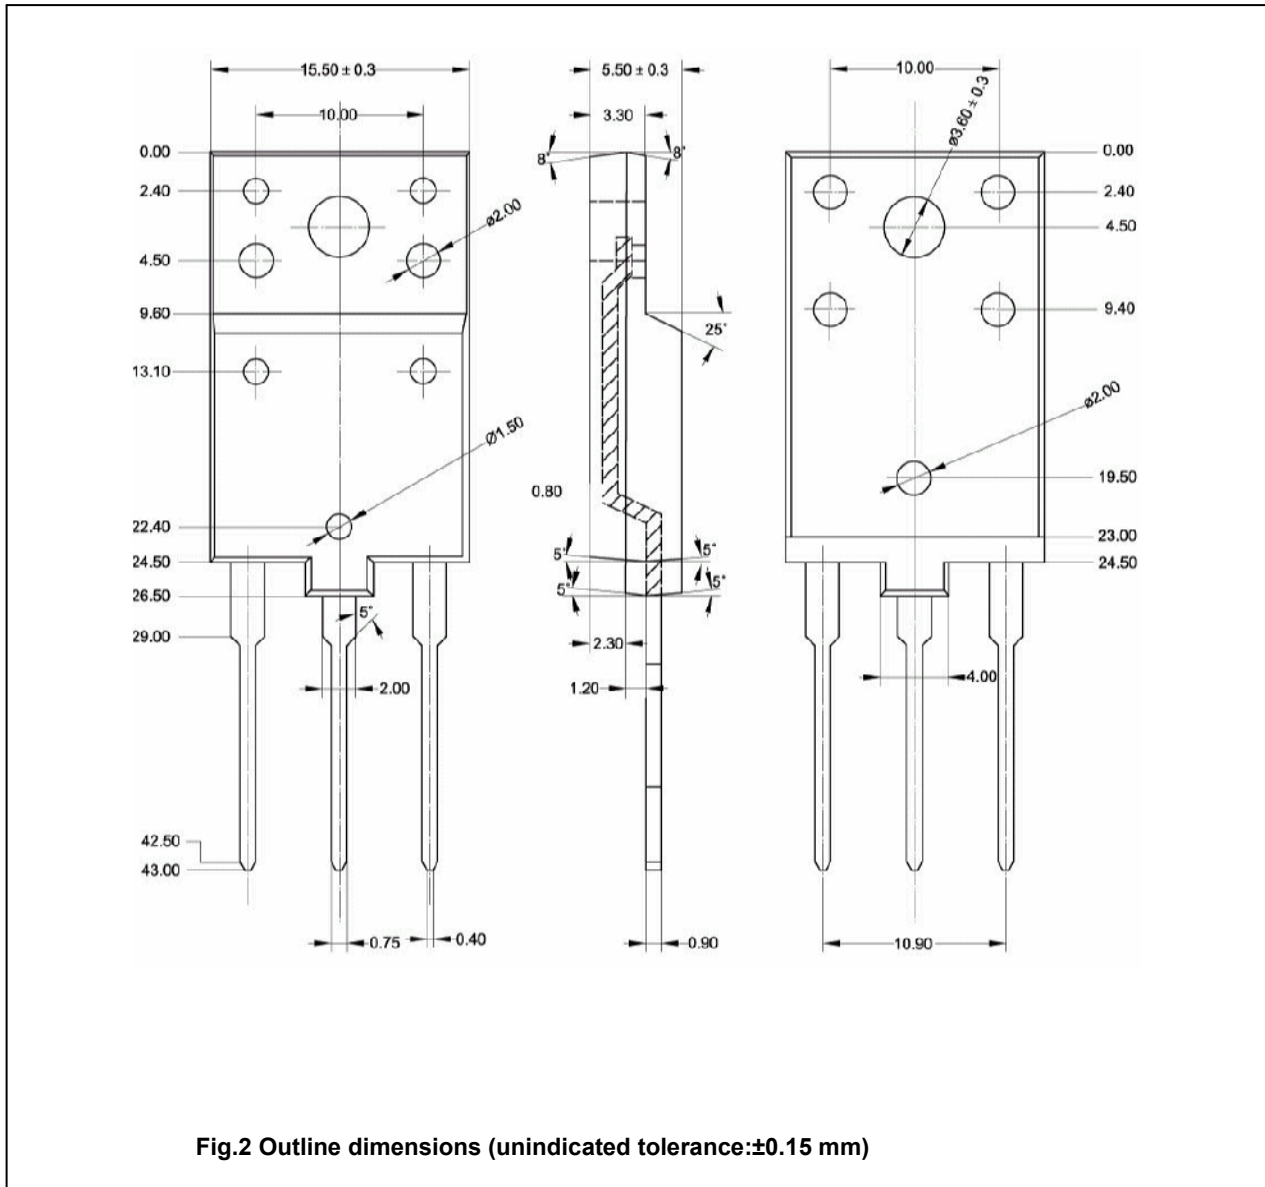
Outline dimensions (unindicated tolerance: ± 0.15 mm)
